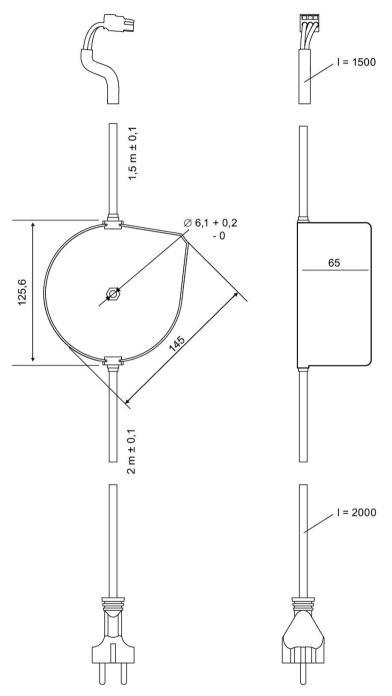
Dimensions of the SIDOOR TRANSFORMER
